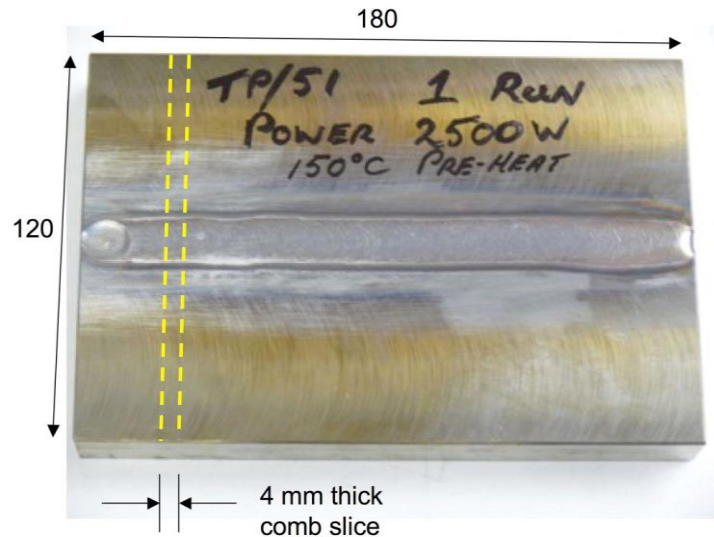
A photograph of the plate prior to removal of a macrograph slice at location shown for an experiment carried out by Francis et al.^[53]. The welding direction was from right to left.
